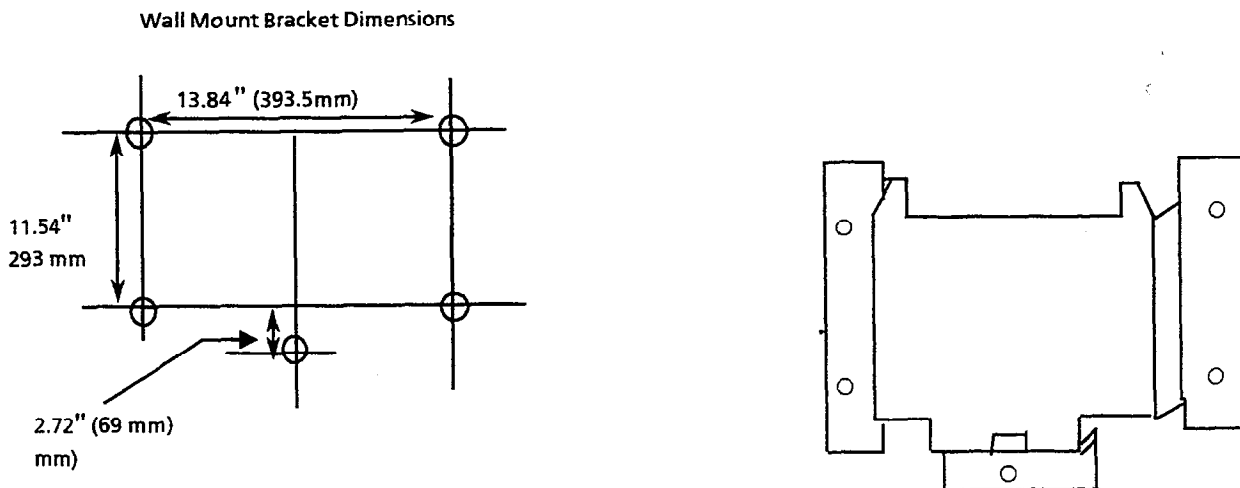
Attaching the Wall Mount Bracket of the Level II Basic KSU to the Wall
